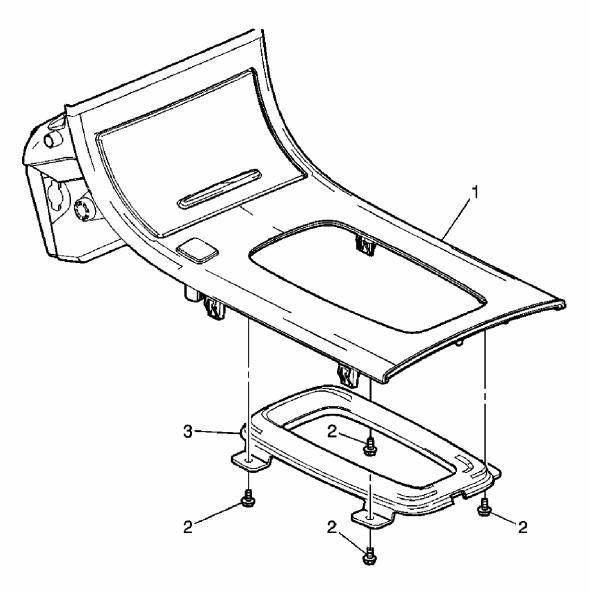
Identifying Console Shift Lever Bezel Courtesy of GENERAL MOTORS CORP.
